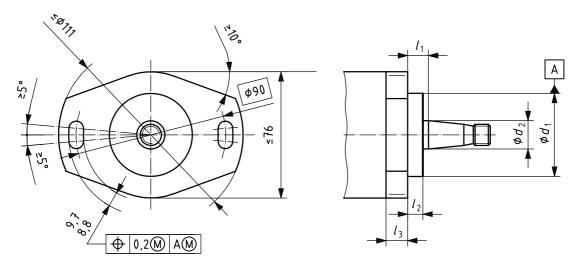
Fuel injection pumps - Type 1 end-mounting flange (standards.iteh.ai)
